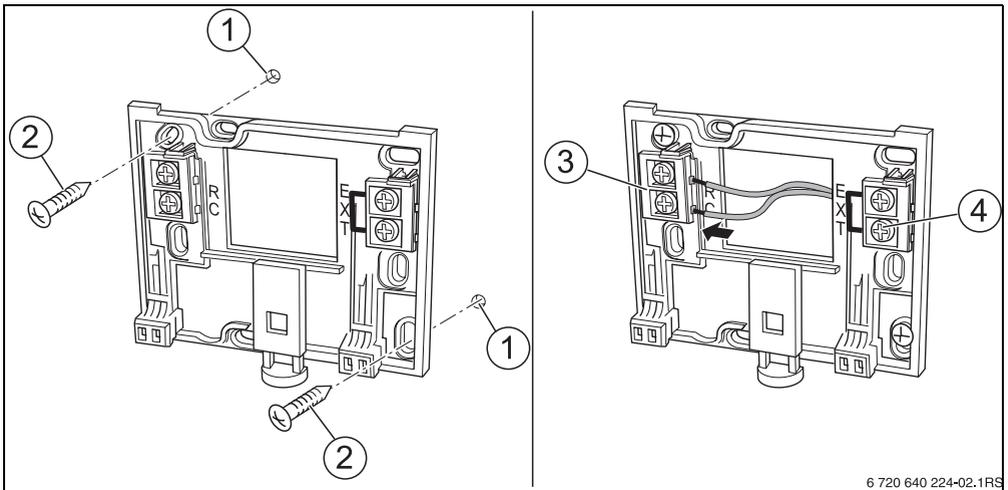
Mounting the wall bracket (left) and connecting the wires (right)
